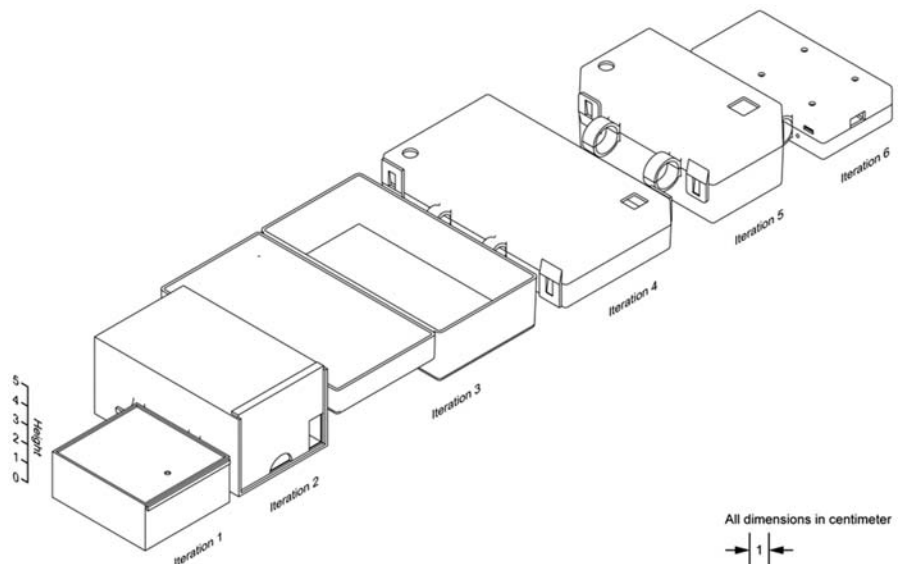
Three-dimensional (3D) printed case design evolution, illustrating from left to right the first prototype detector container consisting of a simple box with sliding top and interior supports for circuit boards and power, the second prototype with probe support, internal shelf, and openings for cables, the third iteration designed with features essential to injection molding, a fourth self-closing design with two identical symmetrical parts to save on molding costs, a fifth modified design with reduced size for ergonomic purposes, and a final sixth case design with reduced thickness.
